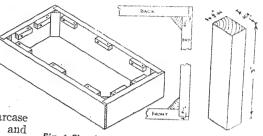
Showing construction of plinth Fig. 5 -- A handle
